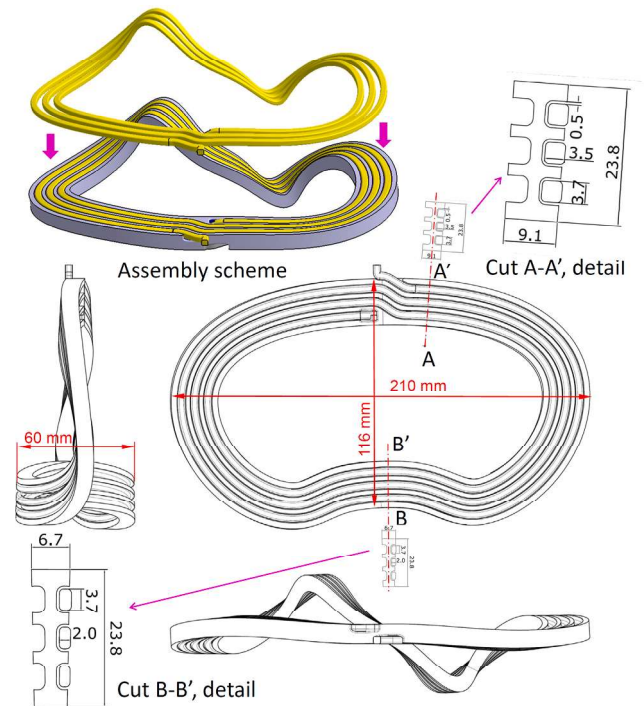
Model, assembly and dimensions of the assayed 3D-printed parts. Dimensions in mm.
